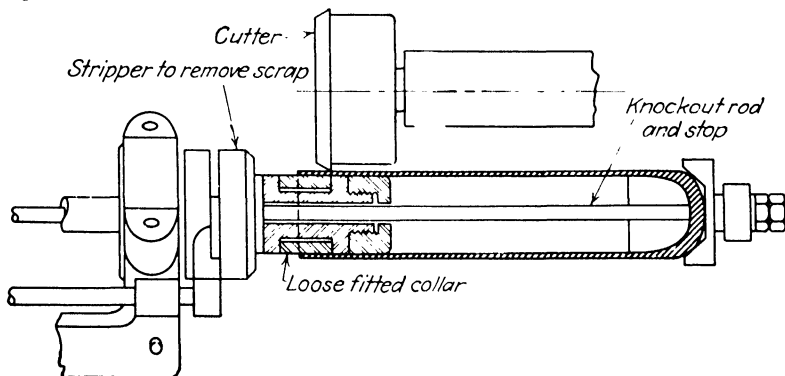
A detail of the setup for shearing the first trim in the preceding figure, showing how the shell is held and end trimmed off.
